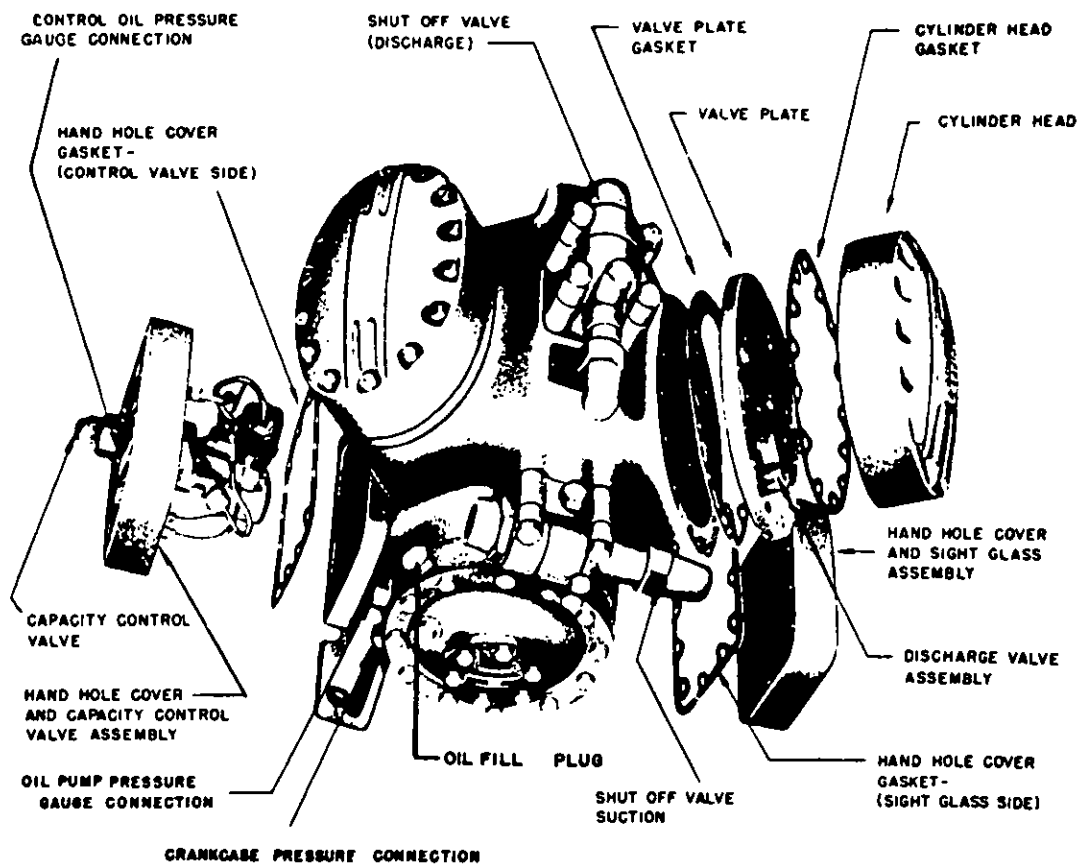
COMPRESSOR, PUMP END VIEW
